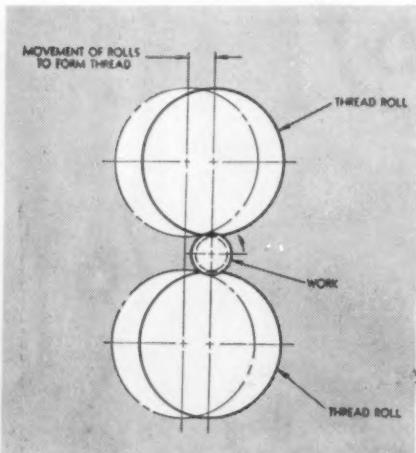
Drawing showing thread rolling in a screw machine using two thread rolls.
